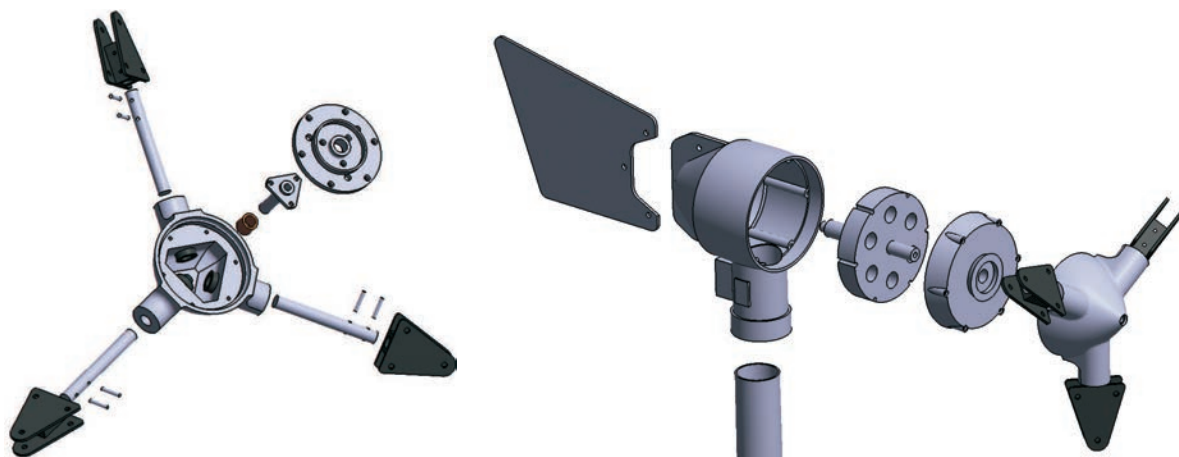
CAD models of the assembly. Left: Details of the hub model. Right: Turbine assembly parts.
